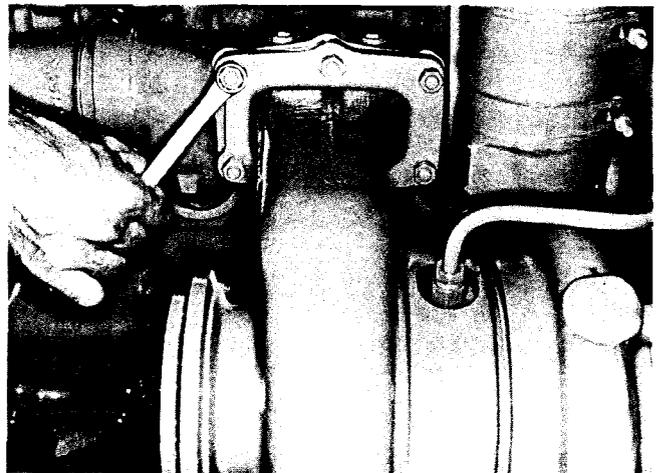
, (N11953). Tightening turbocharger mounting nuts
